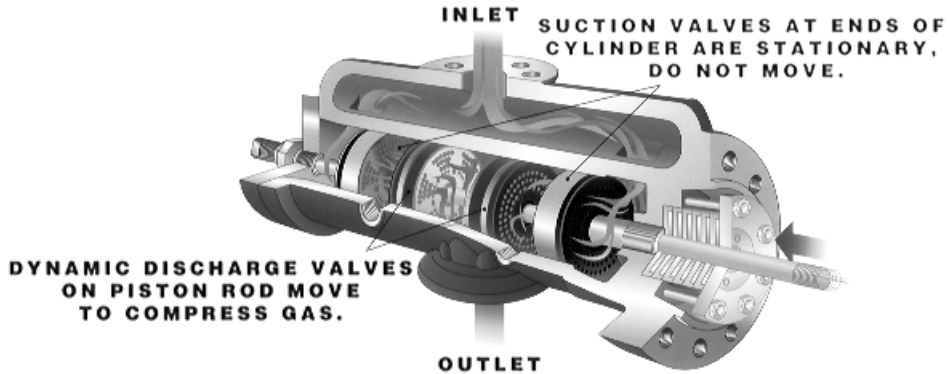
Valve-in-piston (VIP) compressor cylinder. (Dresser-Rand Company, Broken Arrow, Okla.)
